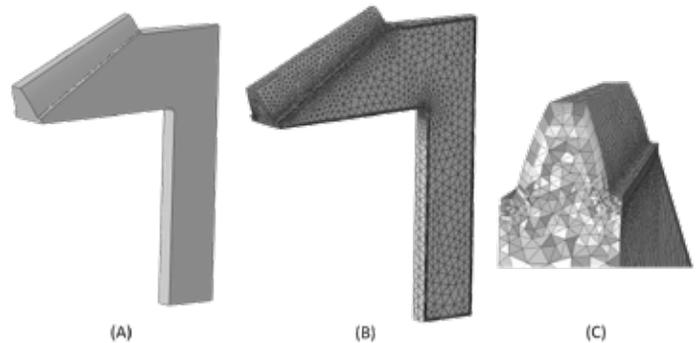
(A) CAD model of single tooth model, (B) single tooth model meshed for FEA, and (C) section view of tooth showing fine mesh layer near the surface of the tooth.
